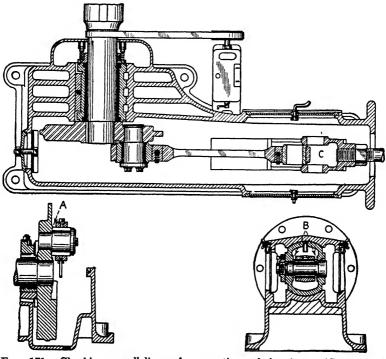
Checking parallelism of connecting-rod bearings. (Courtesy of Power.)
